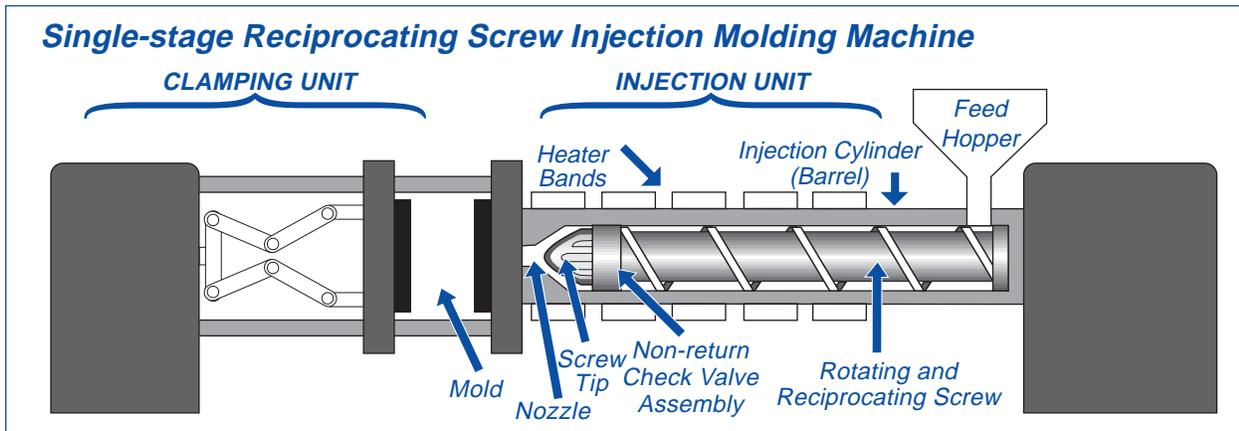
Single-stage reciprocating screw injection molding machine schematic. (not to scale)
